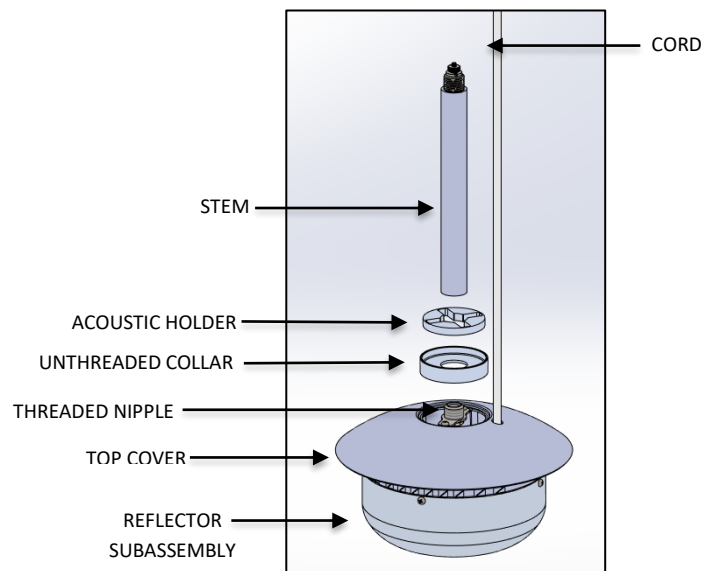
ACOUSTIC PANEL HOLDER ASSEMBLY
